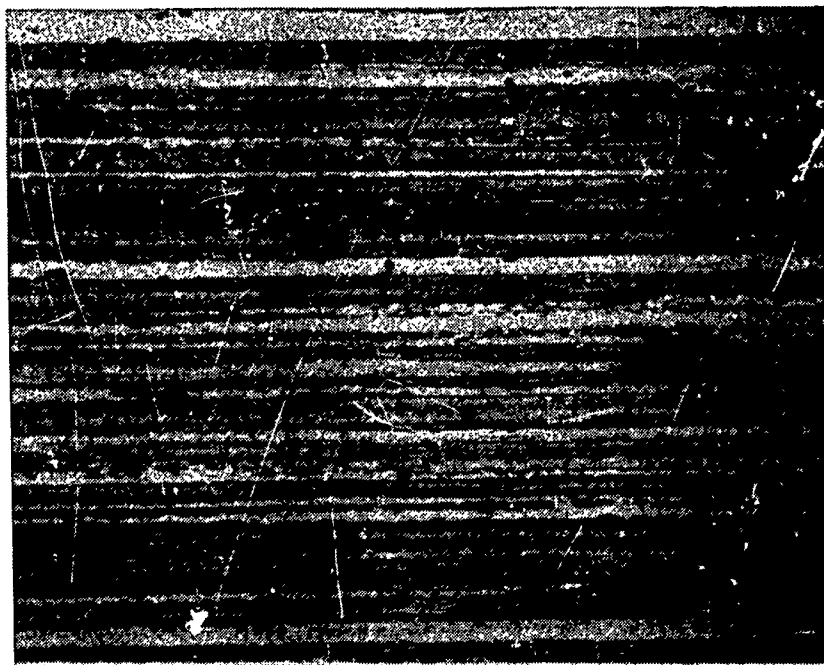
7075-T6511 ALUMINUM EXTRUSION.
